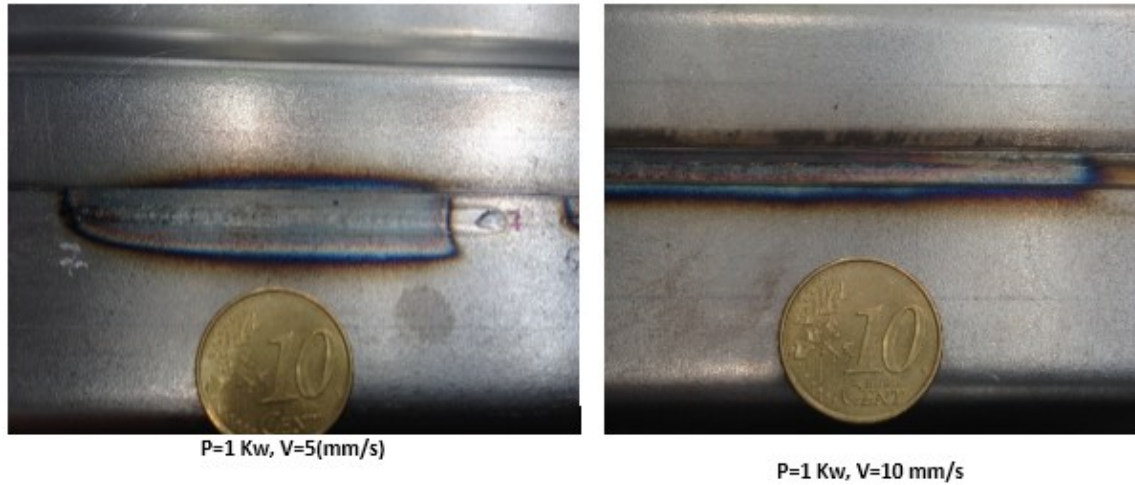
Proximity laser welding, spot dimension=0.1mm
